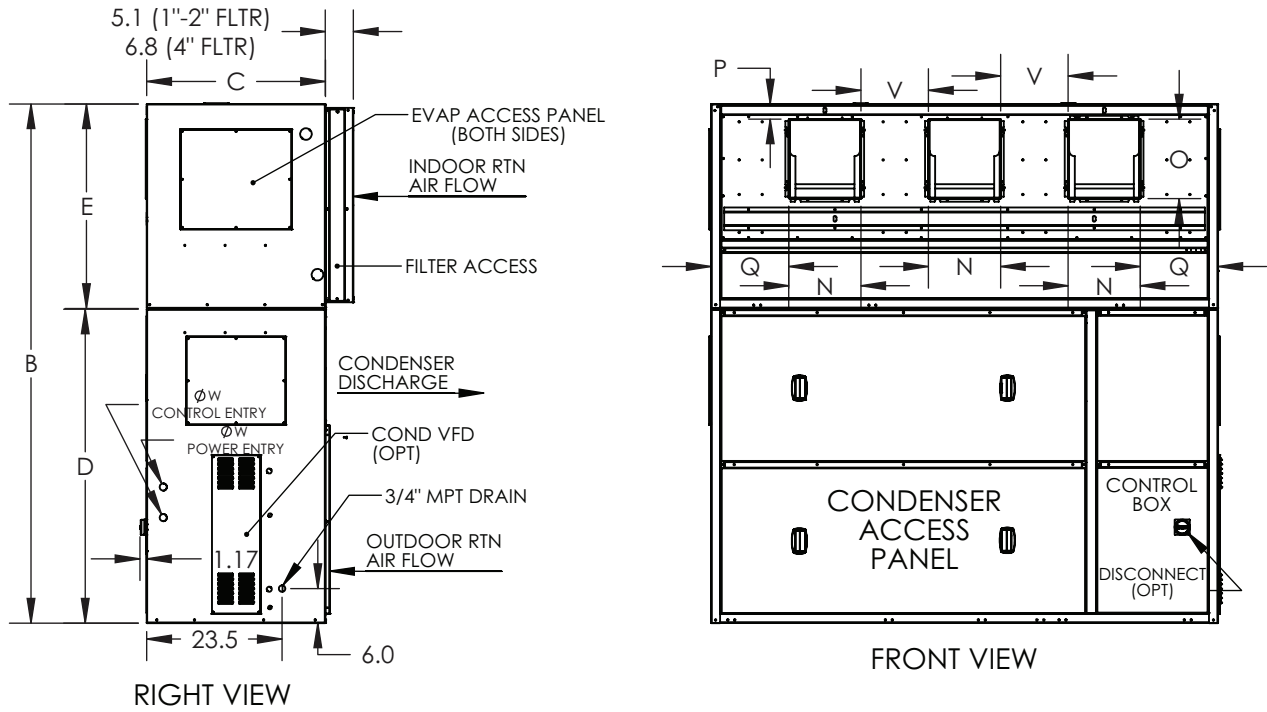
Base Unit Dimensions – 50XCA12,14 (Front Return, Horizontal Discharge)
